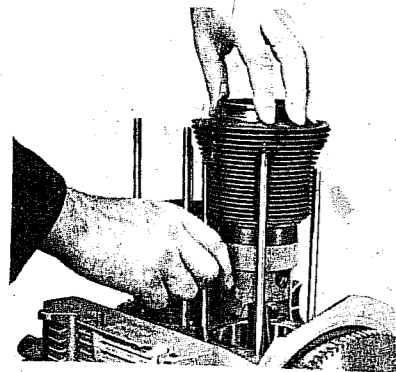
Installing the cylinder, using a piston ring compressor.
